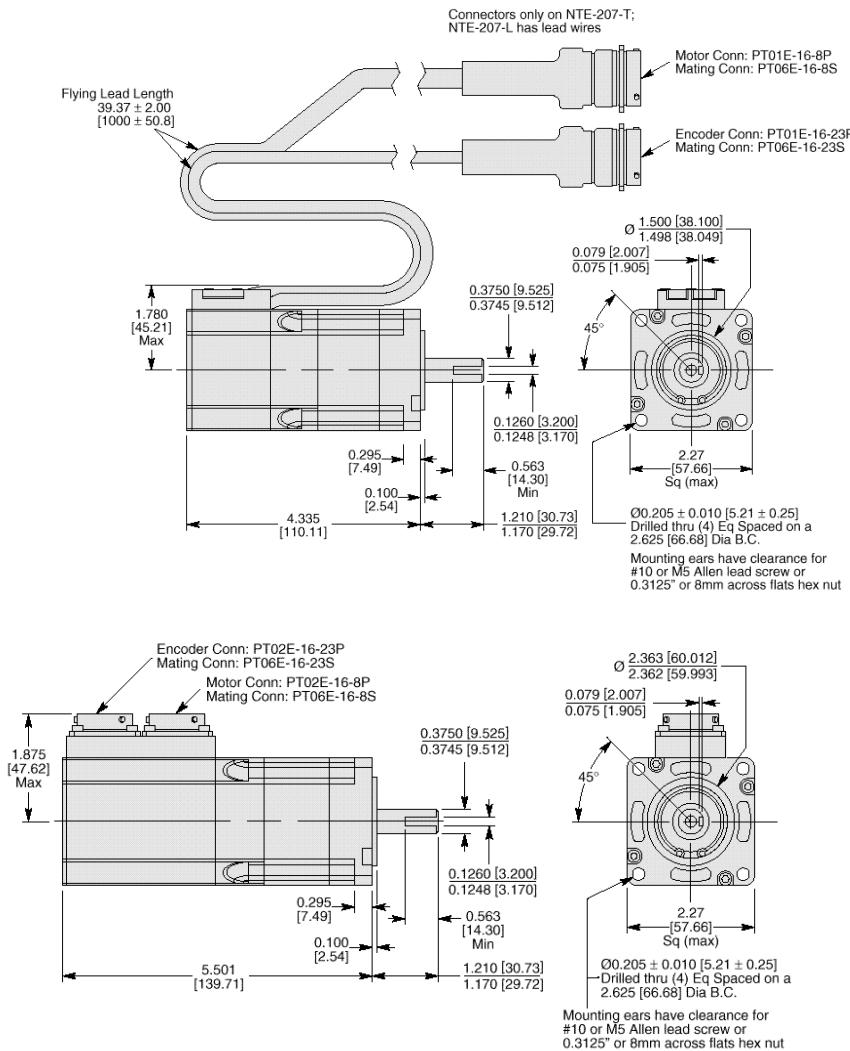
NTE-207 Motors; English Face (NEMA 23 with 3/8 inch shaft)
